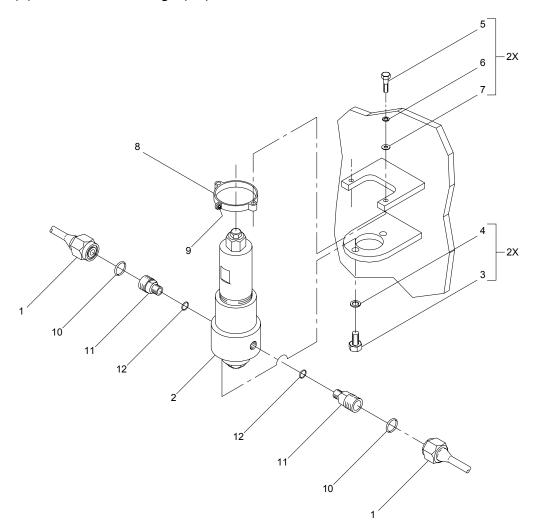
Pressure Reducing Regulator (AHP-V104)
